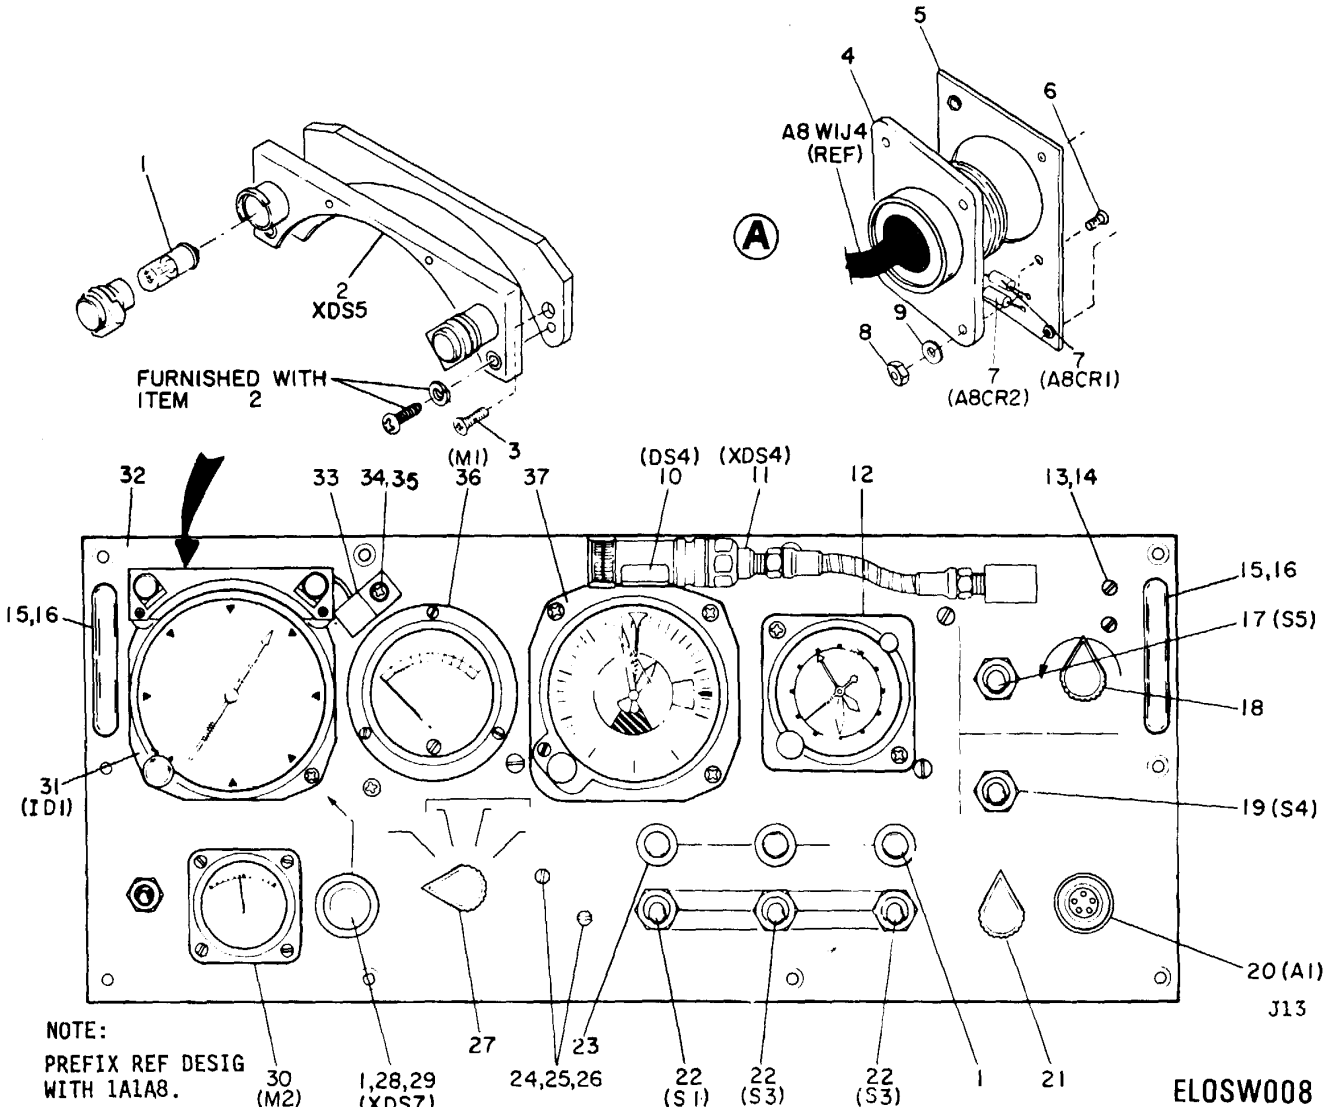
Front Panel Assembly (Sheet 1 of 2).
